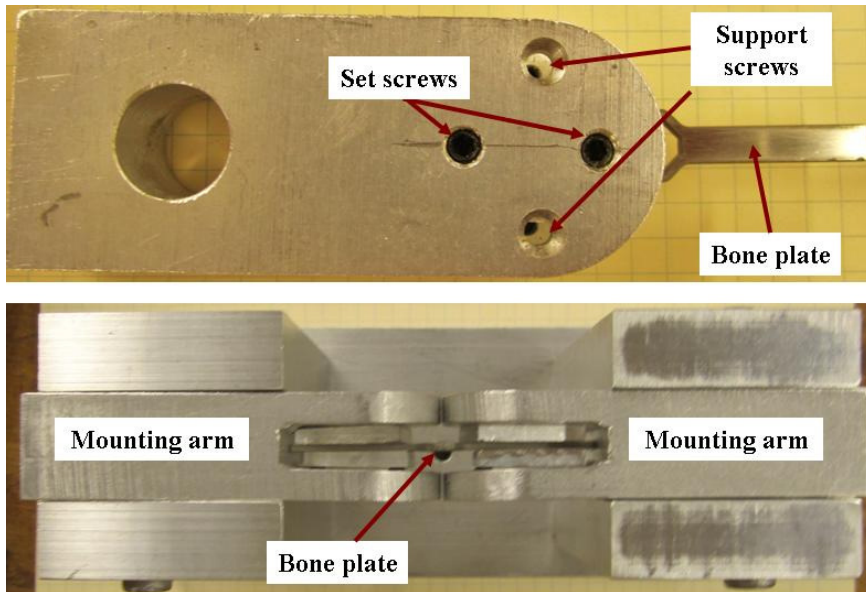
Constraint mechanism with front and top views of the bone plate fixture utilizing shims and set screws.
